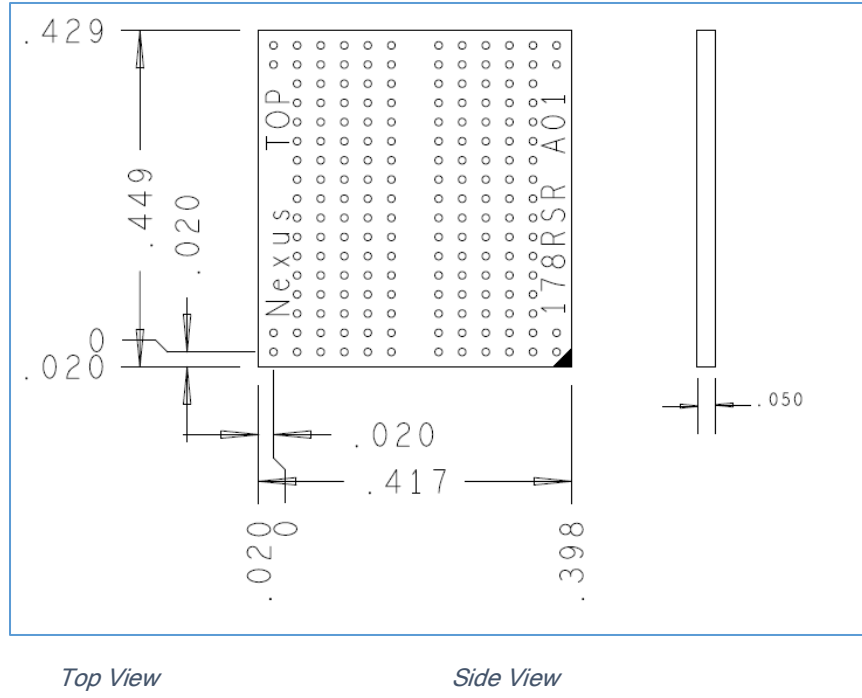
LPDDR3 178 Ball Riser Mechanical Dimensions
